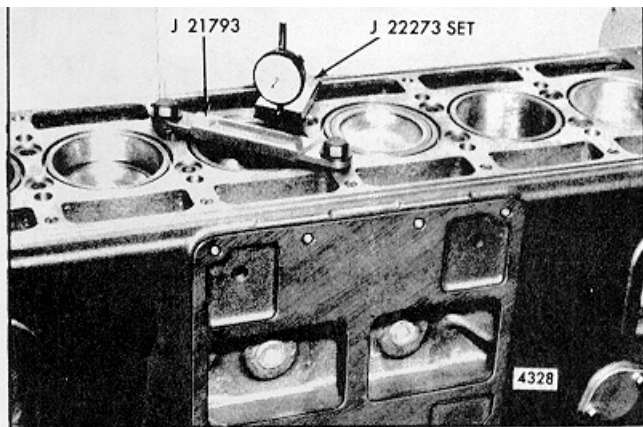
Checking Distance of Liner Flange Below Top Face of Block
